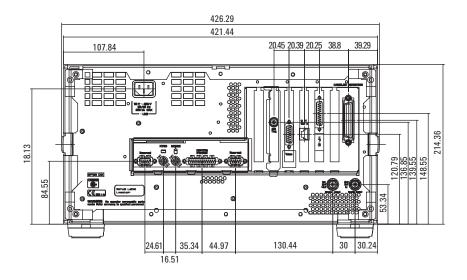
Main unit dimensions (rear view, in millimeters, typical)
